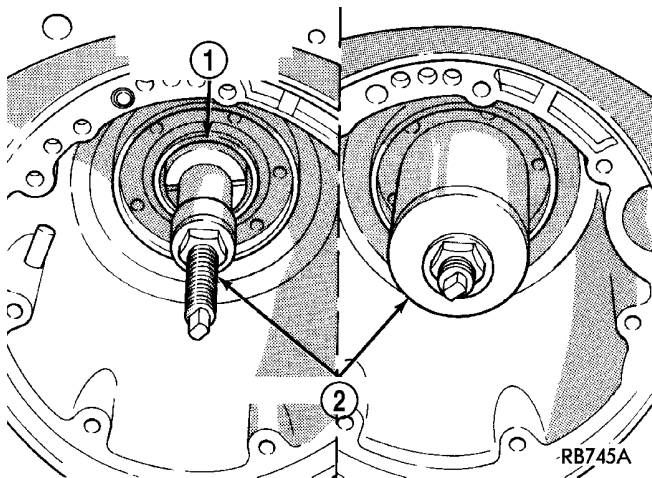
Remove Rear Planetary Annulus Gear Bearing Cup
